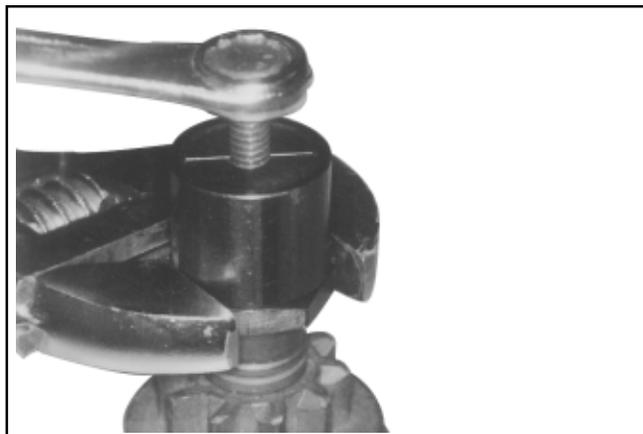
Holding Tool and Turning Center Screw (Clockwise) to Remove Retaining Ring.
